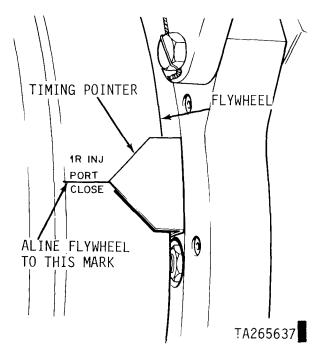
Flywheel in position for fuel injection pumpt timing, model AVDS- 1790-2C and AVDS-1790-2D engines.
